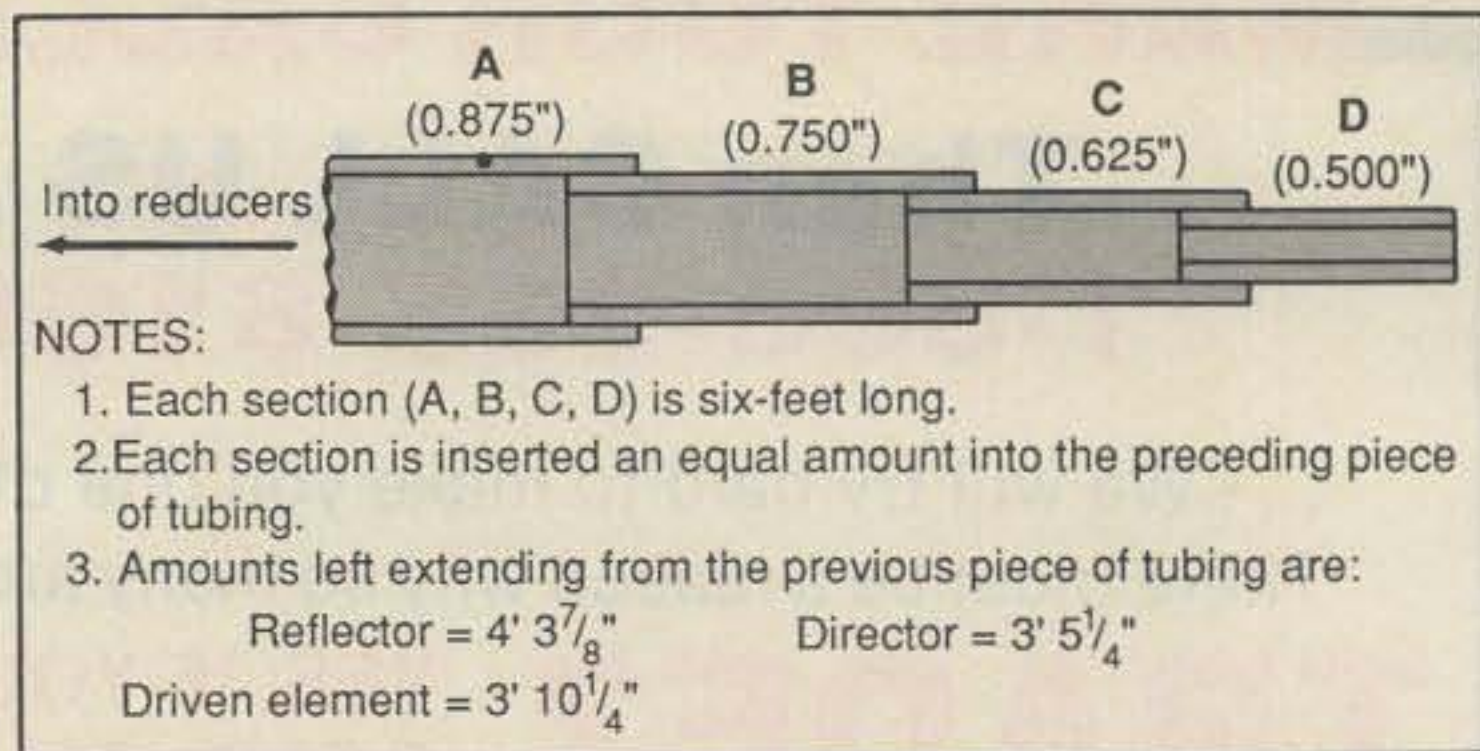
Drawing: Outer tips of 2" sections of elements.
